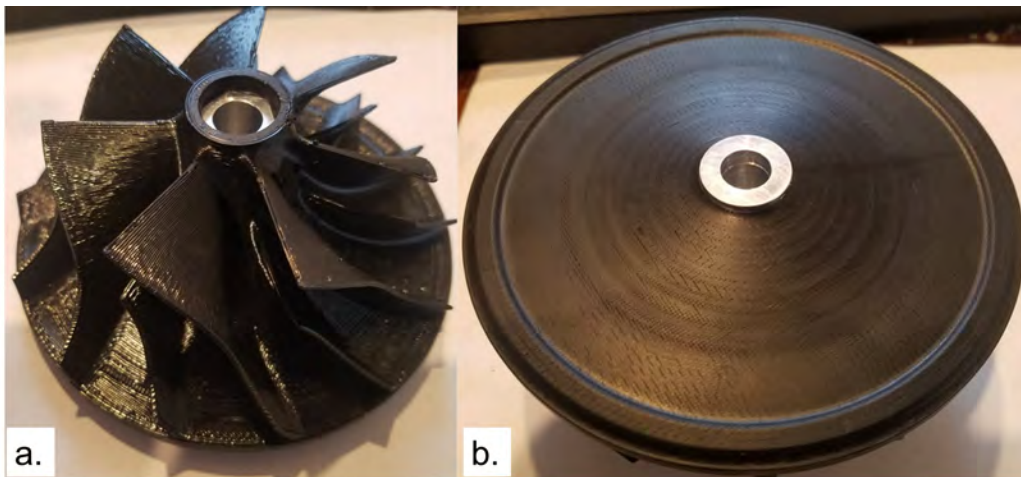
ULTEM 9085 Compressor a) Inlet side b) Exhaust side Post-machined
